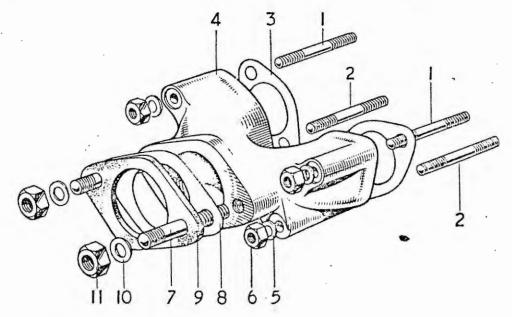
OIL PUMP, RELEASE VALVE AND INLET MANIFOLD
